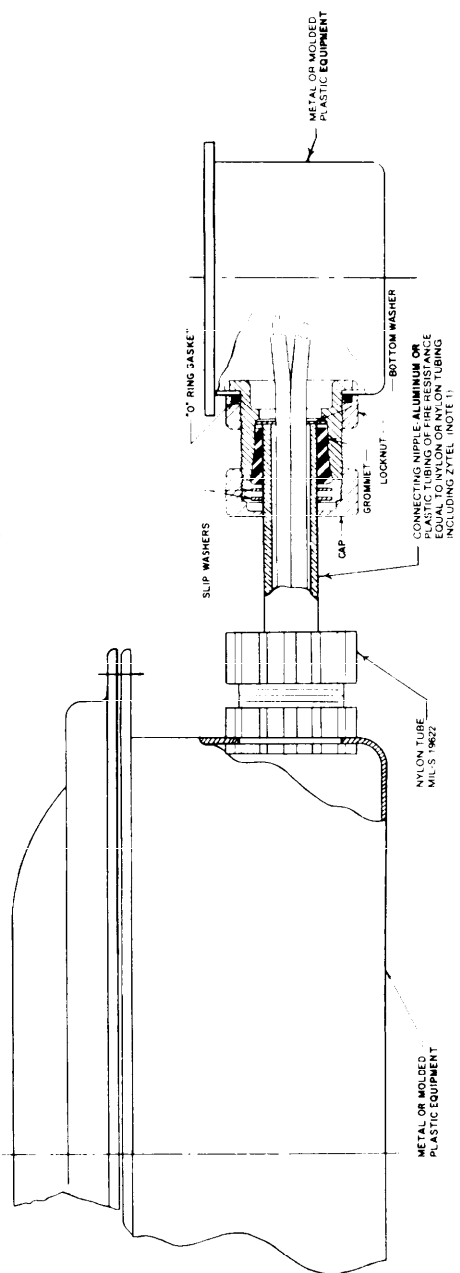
A18. Connecting adjacent equipment with pipe nipples.
